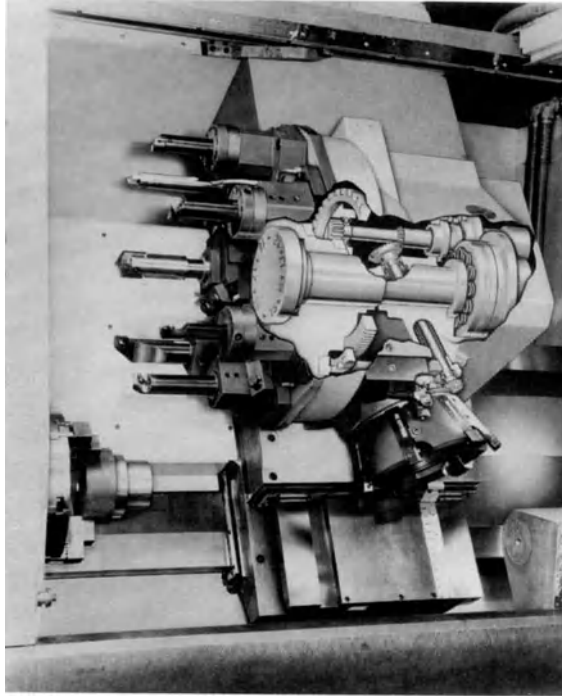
Synchronised dual turret mechanism. [Courtesy of Cincinnati Milacron.]
